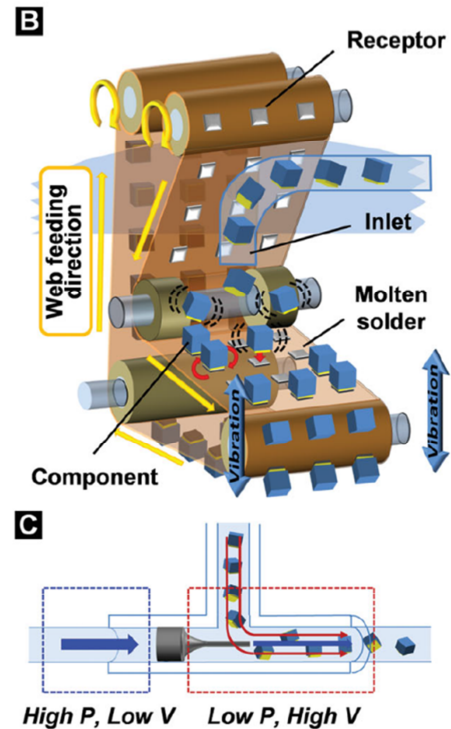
(B) Schematic depicting the details of the automated reel-to-reel molten solder driven fluidic self-assembly machine developed by Park, Jacobs, *et al.* (C) Schematic illustrating the jet pump principle used to achieve recirculation of the chips.^[49]
